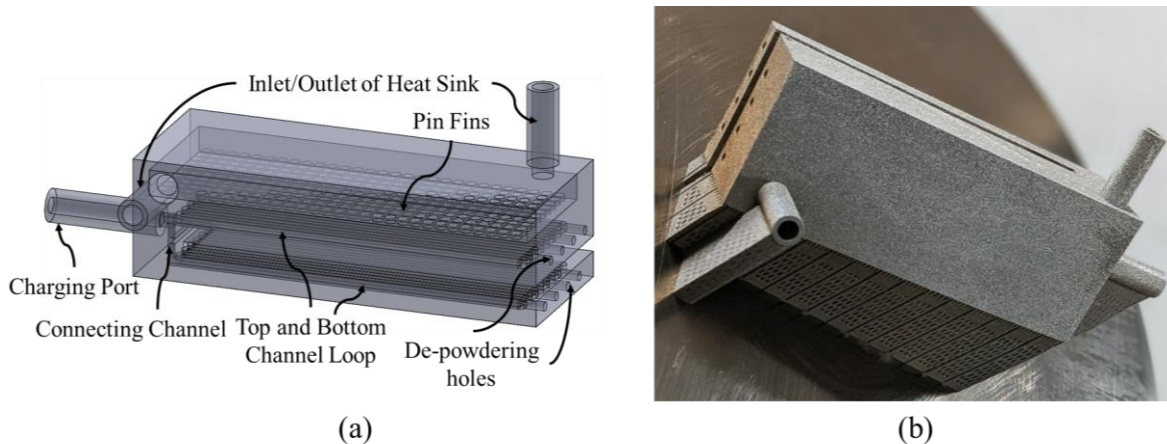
C-shaped OHP with integrated cold plate: (a) CAD model showing charging port, connecting channels, inlet and outlet ports, and pin-fin array; (b) additively manufactured SS316L part on the build plate with support structures.
